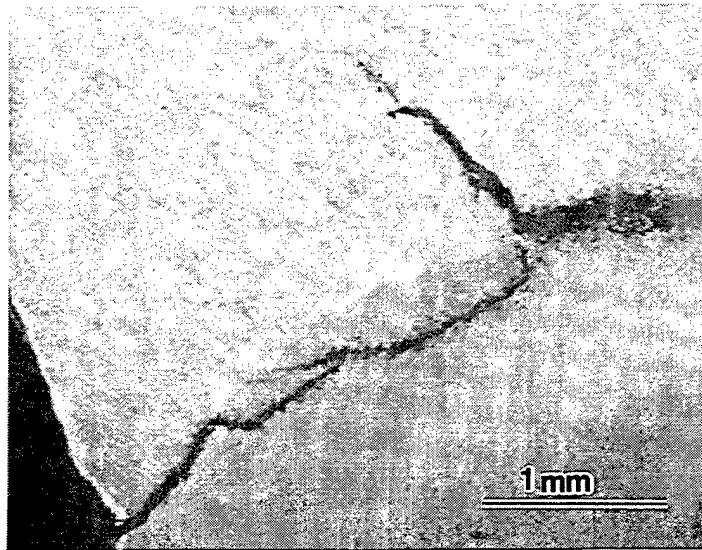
Underbead cracking from top of weld. UWW03
